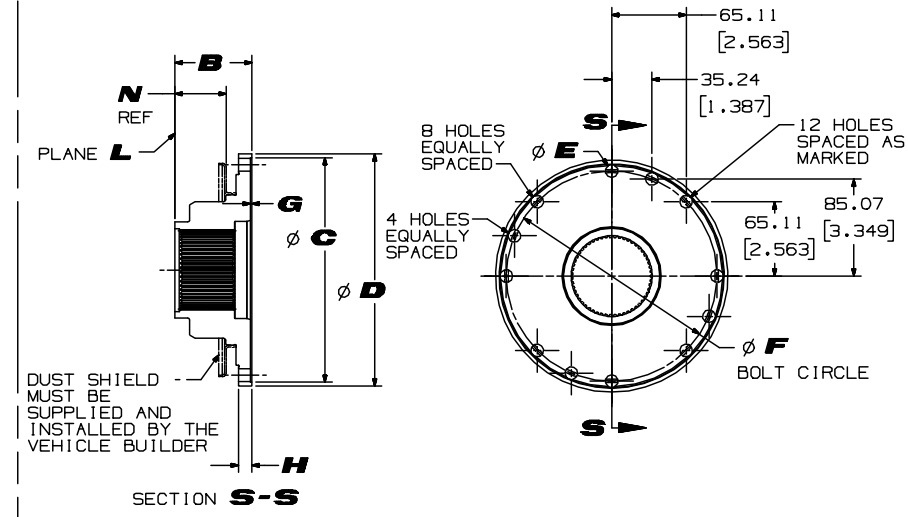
FIGURE IV: COMPANION FLANGE ASSEMBLY (SPICER 1810 SERIES)
